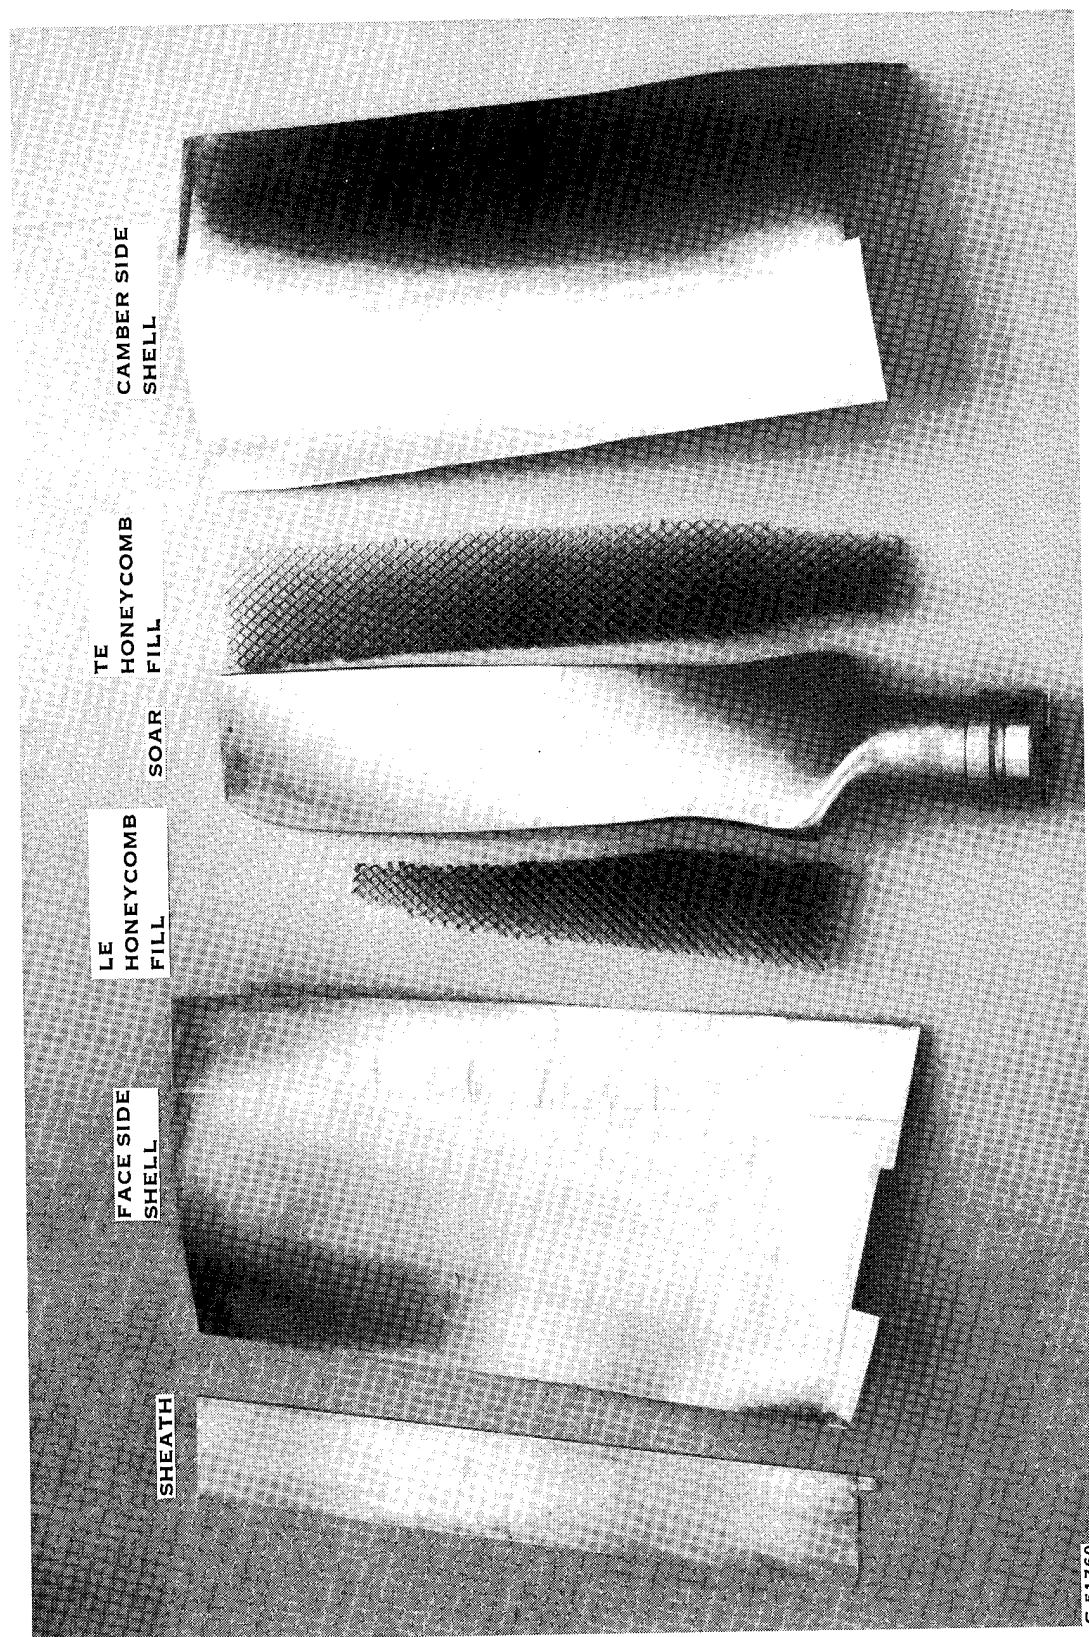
DETAIL PARTS OF DEMONSTRATION AIRFOIL PRESSING PRIOR TO ASSEMBLY
